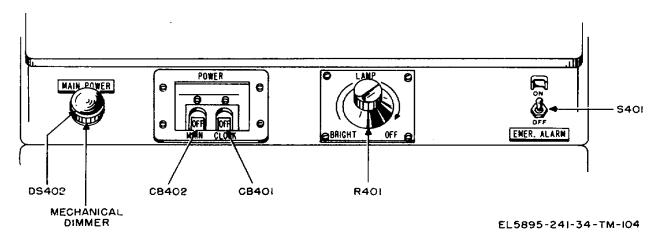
Cabinet, Electrical Equipment CY-2940/FSW-8, power panel, parts location.
